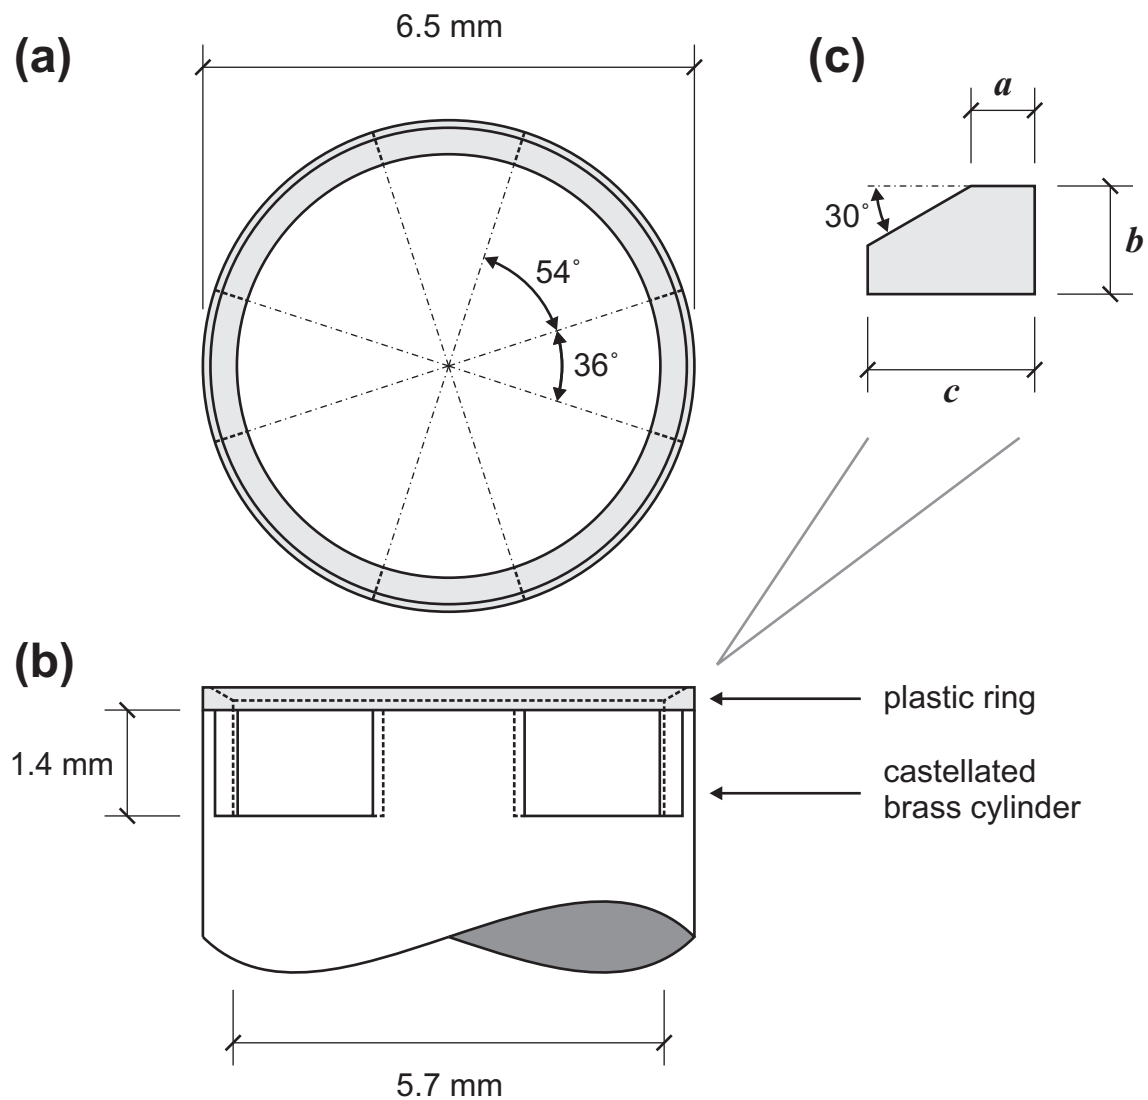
The lens support: (a) plan, (b) elevation, and (c) the support ring cross-section. (Adapted from Burd et al., 2011).
